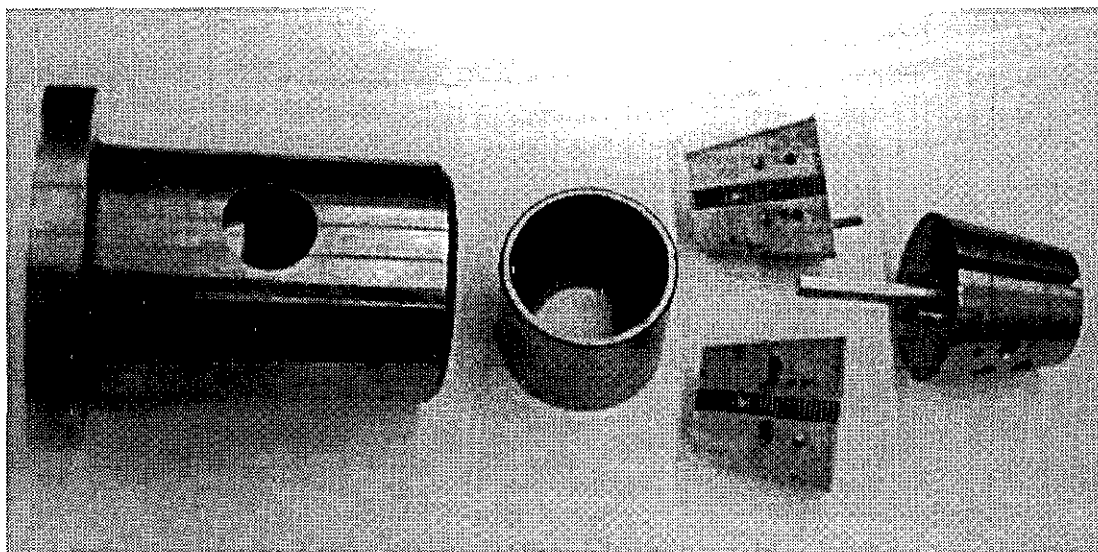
Photograph of Celanese Jig Compression Test Fixture.
